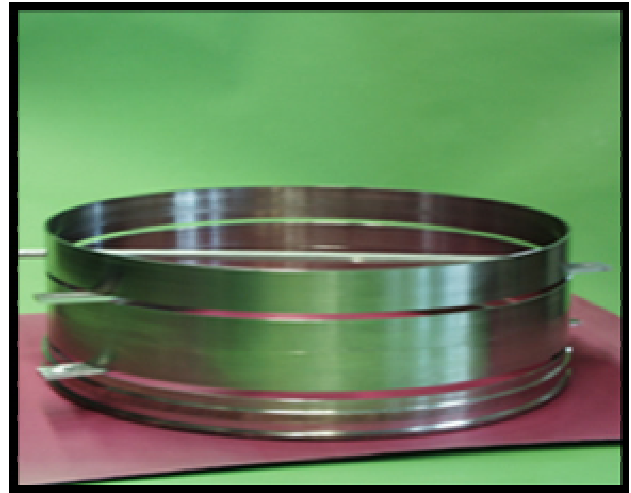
Rings excised from castings by electro-discharge wire machining to 4 mm thickness, cleaned by turning to 3 mm and split into different heights to accommodate for the structural welding set-ups.
